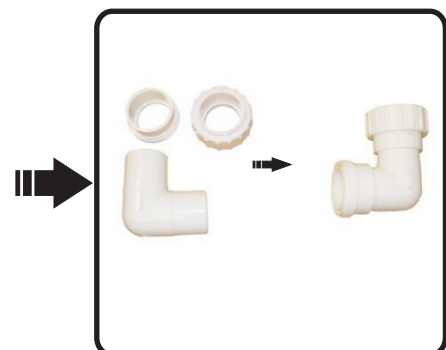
If doing a standard assembly glue the parts together as shown above. If doing a non standard assembly then use the pieces as needed.
